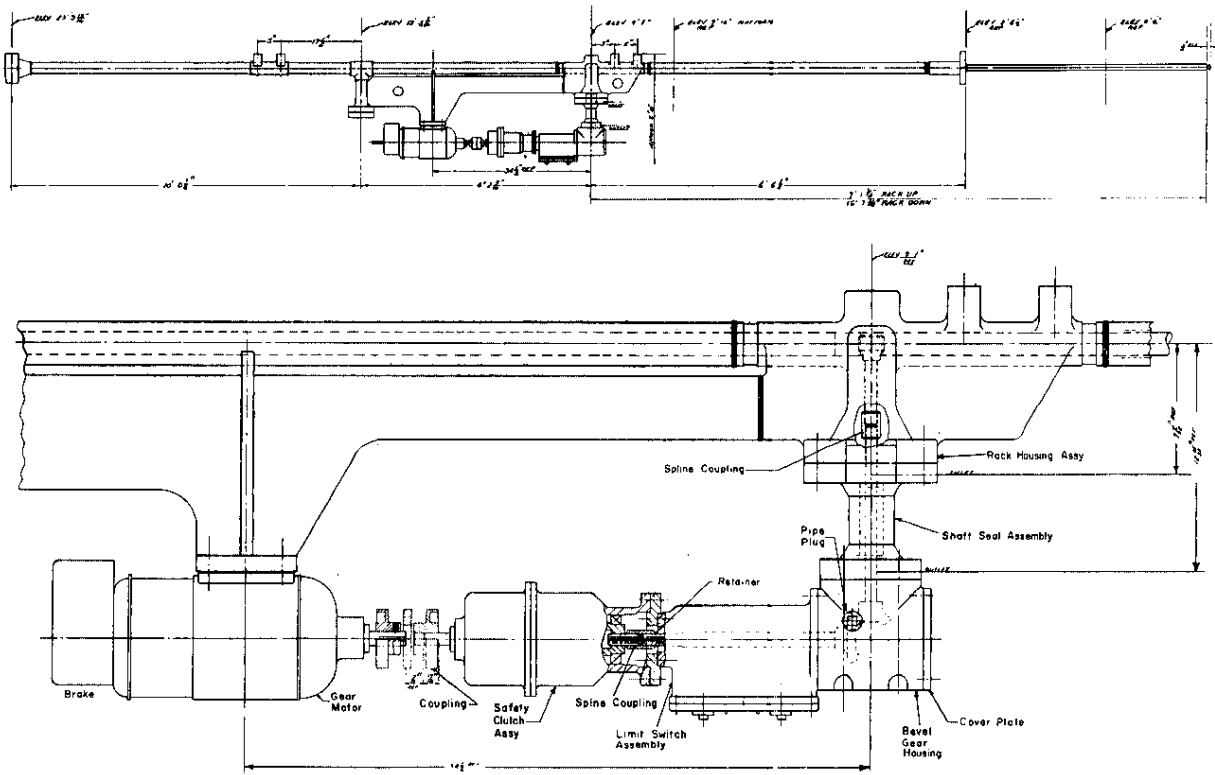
SAFETY ROD DRIVE ARRANGEMENT
